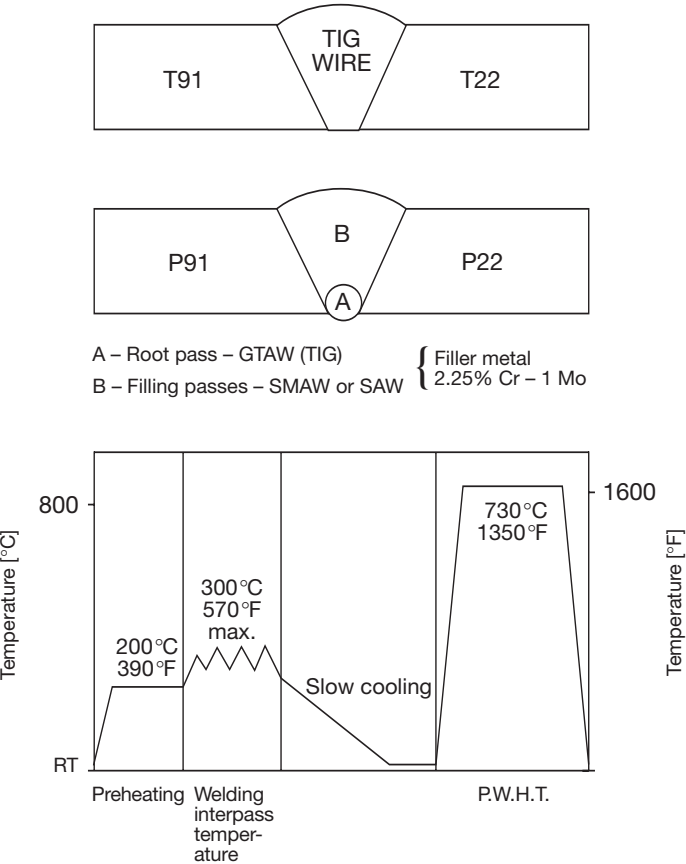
Welding of T/P91 to T/P22
